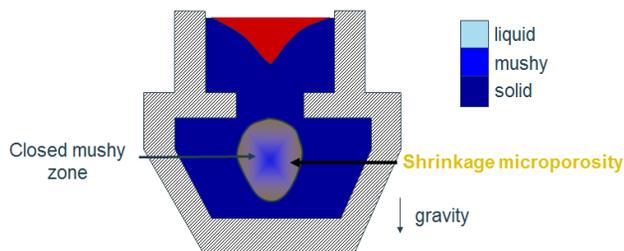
Schematic illustration of a solidifying casted component with closed liquid pocket
